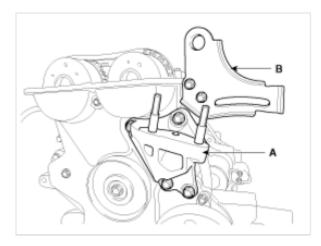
Identifying Engine Support Bracket And Alternator Bracket Courtesy of HYUNDAI MOTOR AMERICA
